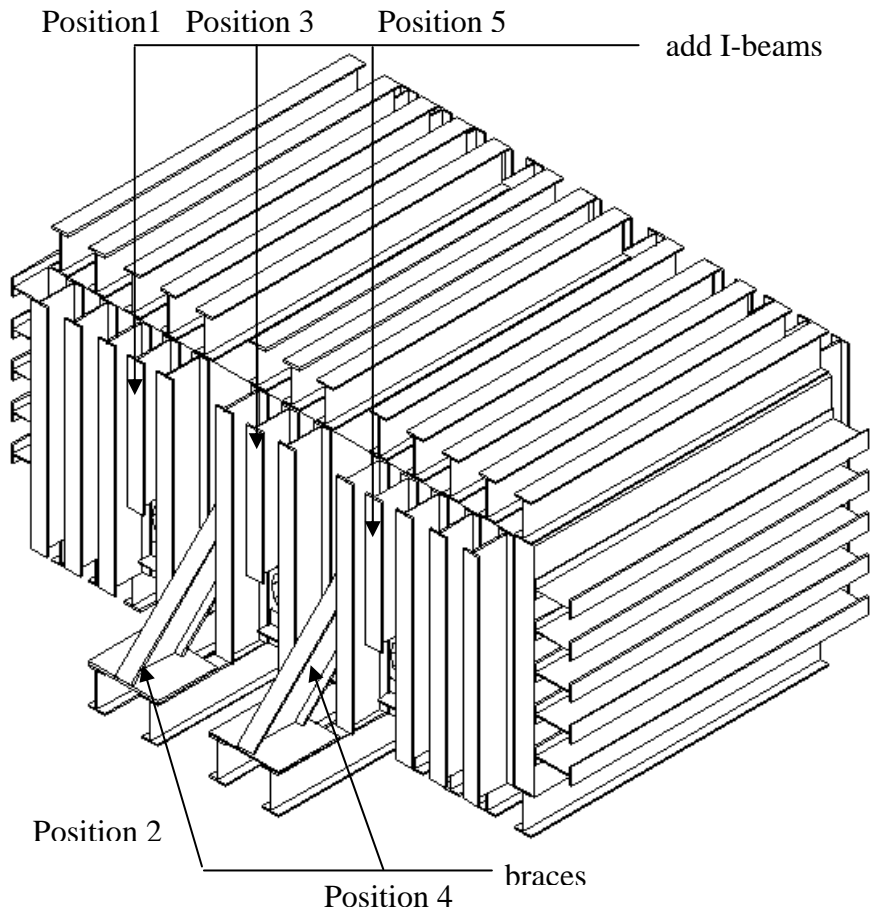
Proposed brace structure and vertical I-beams on front and rear panels.
